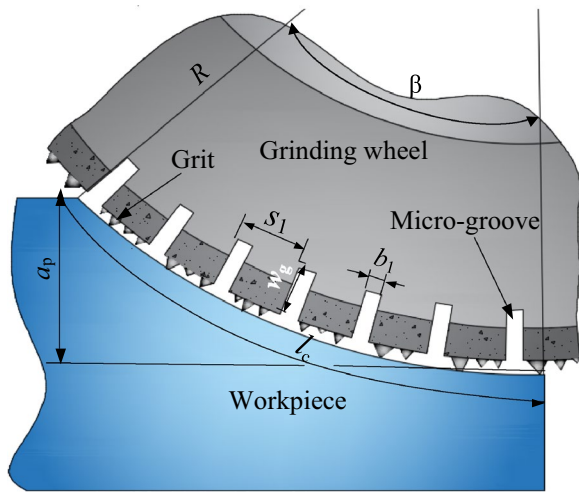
Contact zone between the workpiece and orderly-micro-grooved wheel
